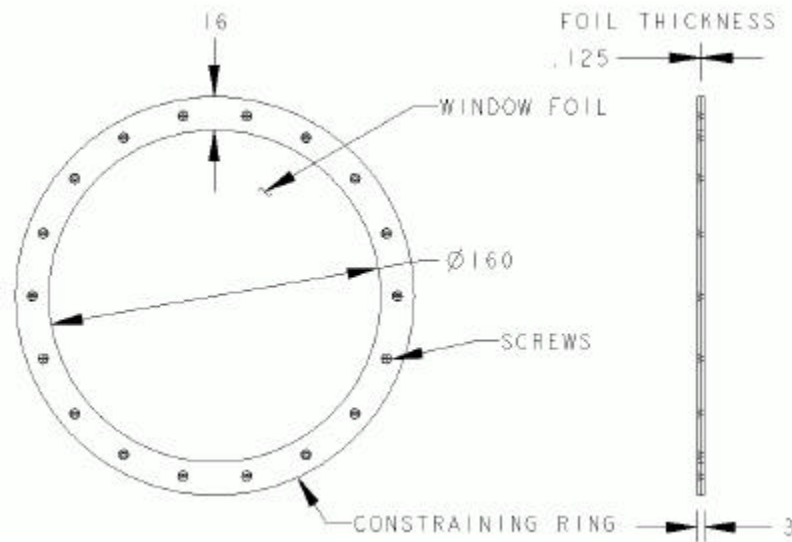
Layout of aluminum test window created to match Beryllium window dimensions (all dimensions in mm).
